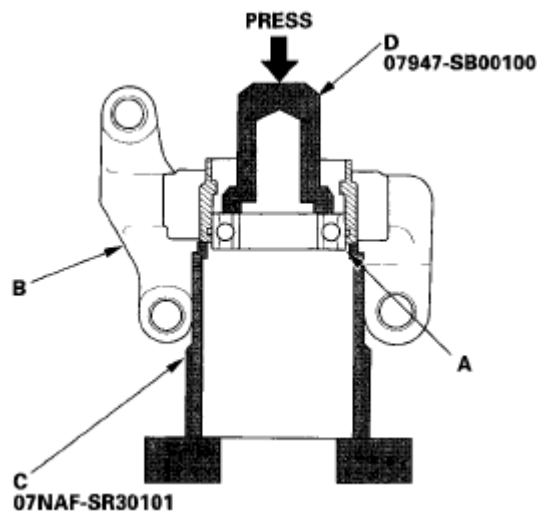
Pressing Intermediate Shaft Bearing Out Of Bearing Support
